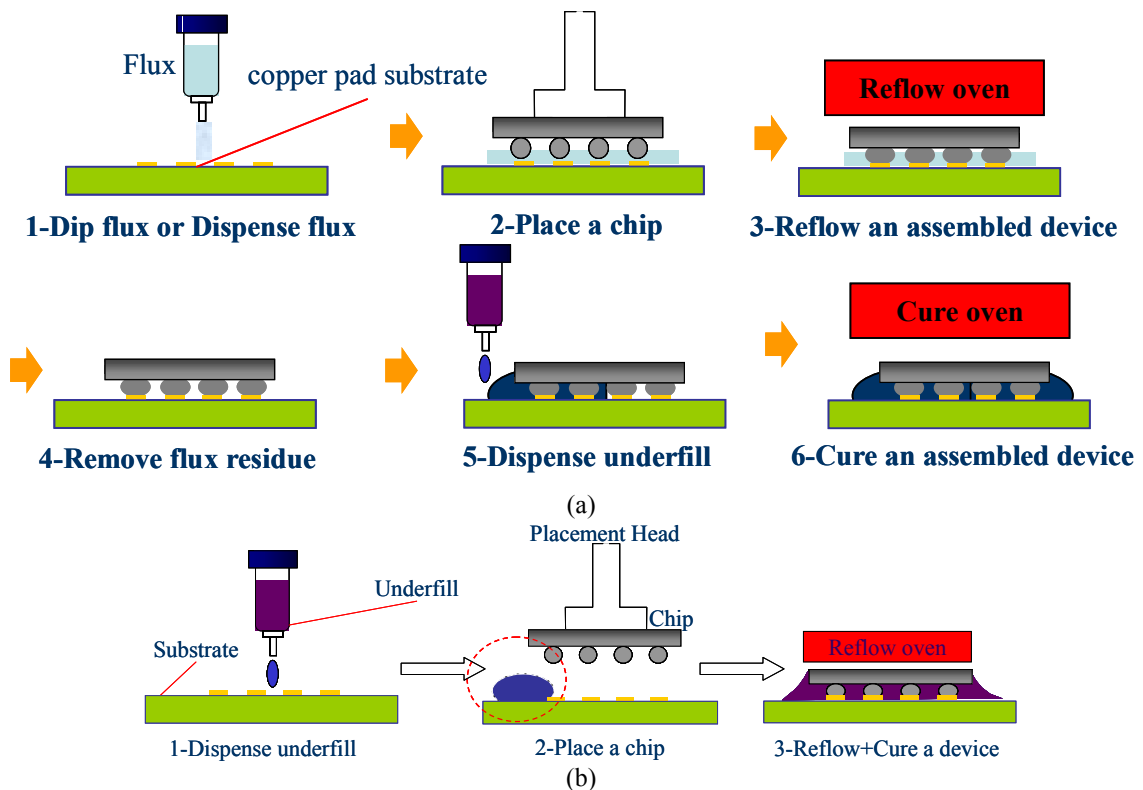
Schematic of flip chip assembly process: (a) conventional assembly process and (b) hybrid no-flow assembly process [8]
